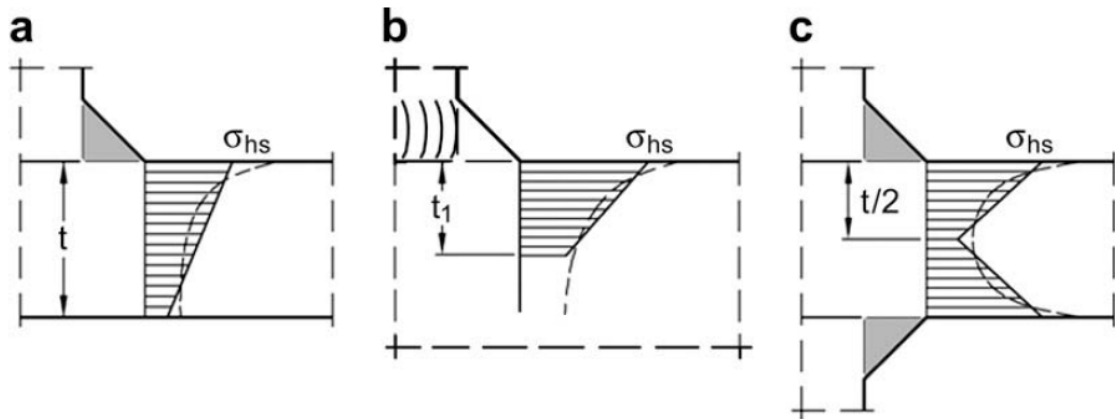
Internal linearization of the structural stresses as proposed by Dong et al. for single-sided weld (a), edge weld (b) and double-sided weld (c) resulting in the hot spot structural stress σ_{hs} ; cross-sections (a, c) and front view (b) (Radaj et al., 2009)
